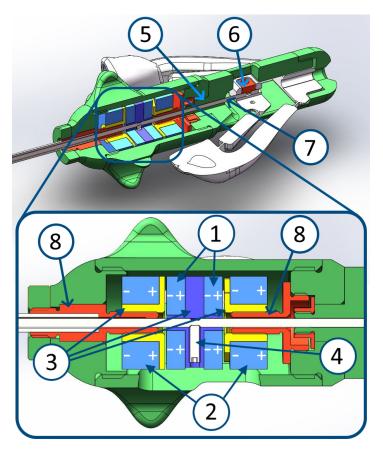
Balancing mechanism and handle cross section view, with push pull magnet pair (1), housing magnet pair (2), magnet mounts (3), screw pin (4), grasper rotation joint (5), push pull rod locking (6) and push pull rod (7). The magnetization direction of the magnets are noted with the (+) and (-).
